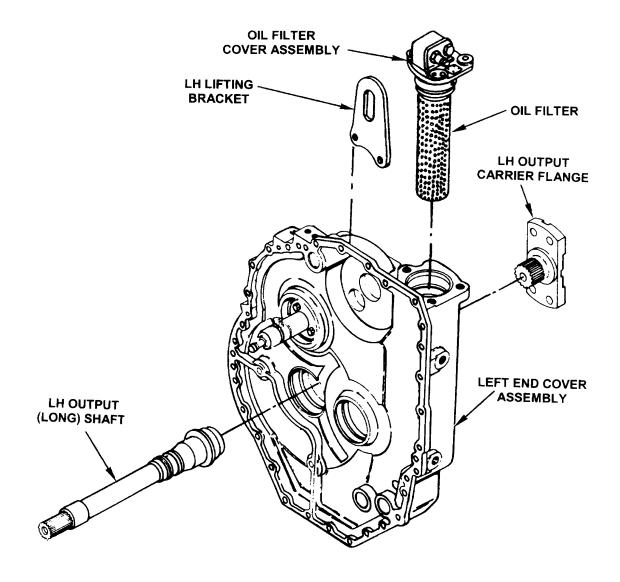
Exploded View of Major Components Left End Cover Assembly.
